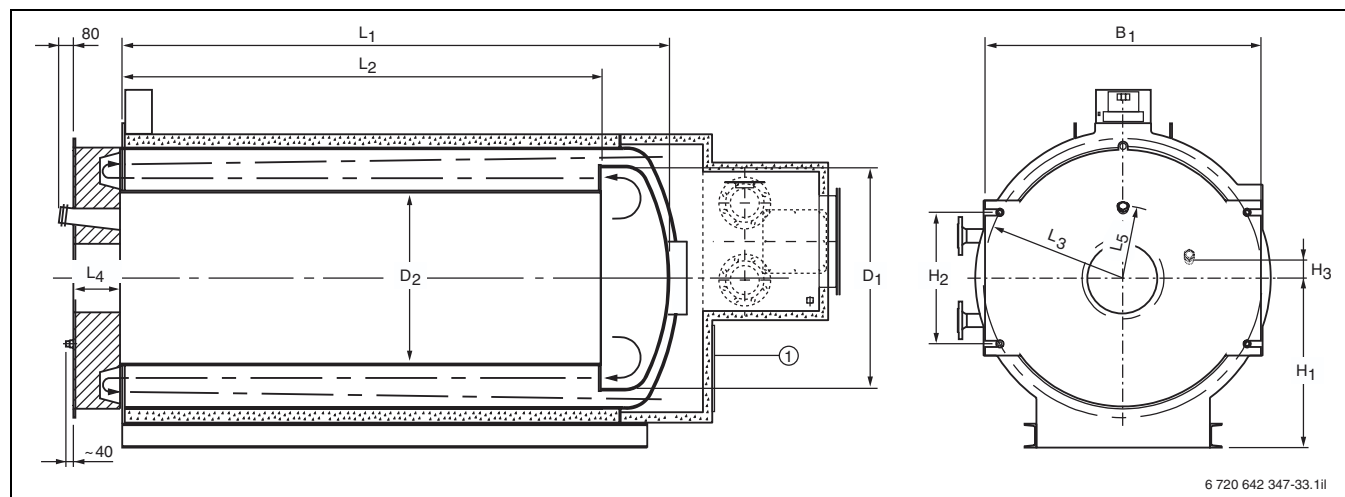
Combustion chamber dimensions Logano plus SB825L LN, boiler sizes 750 to 3500 (dim. in mm)
